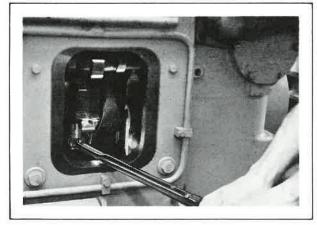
TIGHTENING CONNECTING ROD CAP BOLTS.
